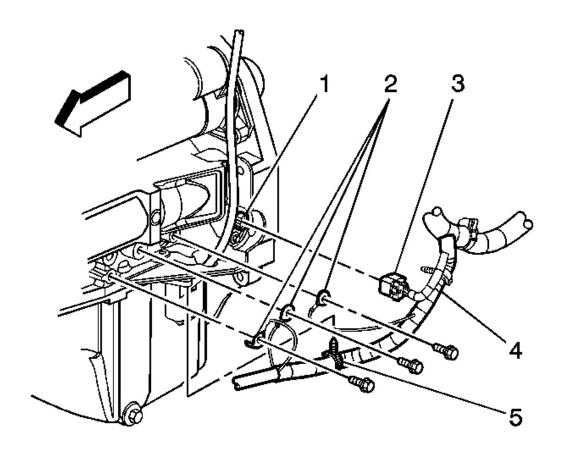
View Of Engine Wiring Harness Courtesy of GENERAL MOTORS CORP.
